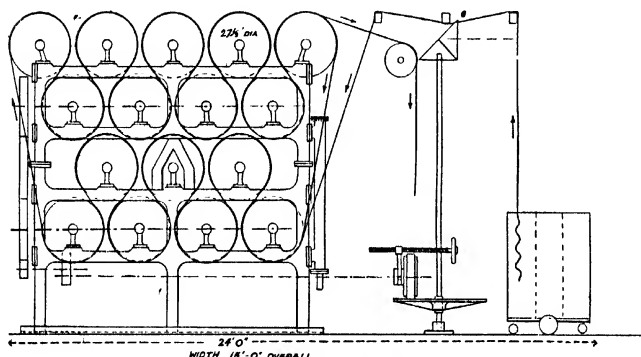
Sixteen-Cylinder Warp Drying Machine.
